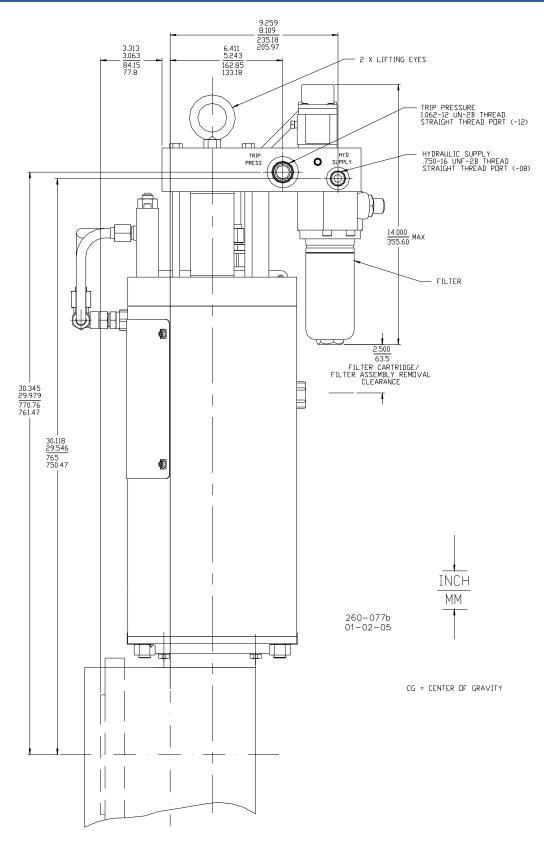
Gas Stop/Ratio Valve Outline Drawing (4-inch)
